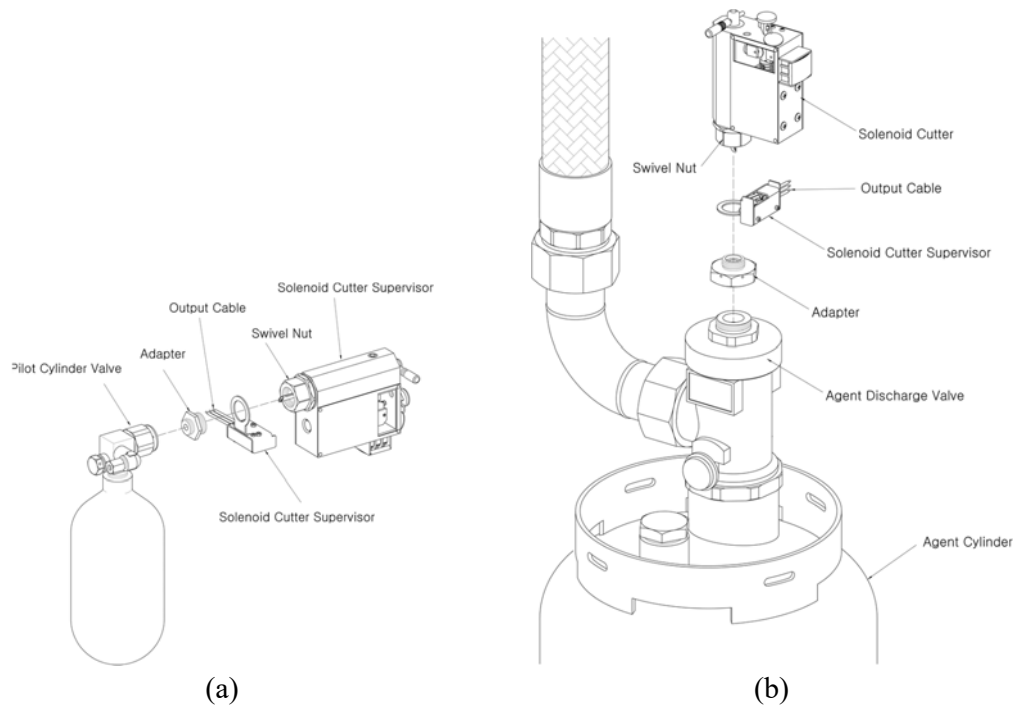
Installation of Solenoid Cutter Supervisor in (a) pilot cylinder (b) agent discharge valve
